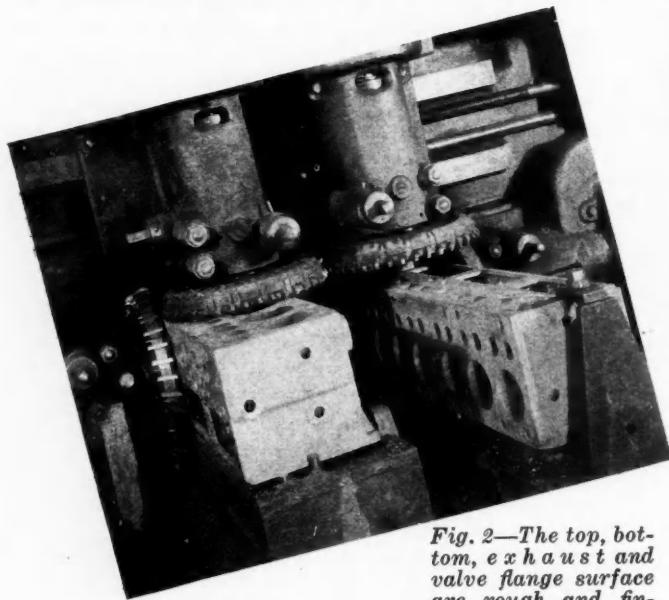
The top, bottom, exhaust and valve flange surfaces are rough and finished milled on an Ingersoll multiple head planer type miller
